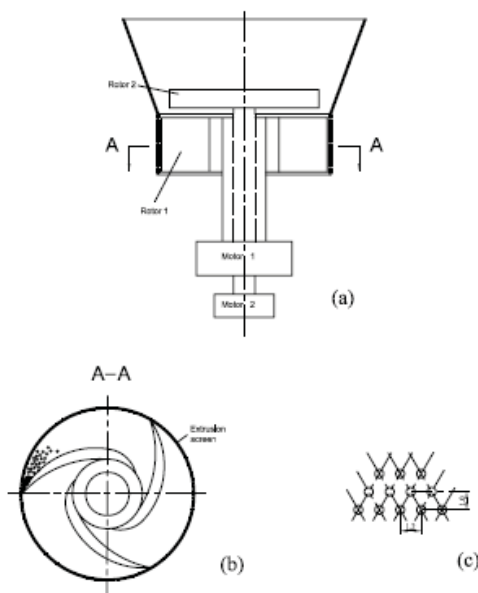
Schematic view of a basket extruder. (a) View of extruder; (b) A-A section view; (c) Outspread view of extrusion screen
